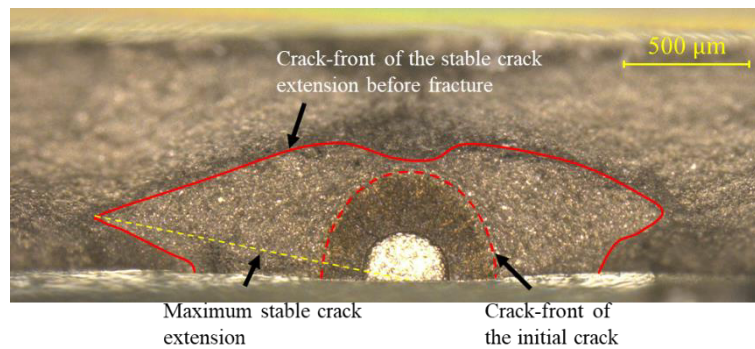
Fractographic analysis with optical microscope of the fracture surface at crack plane of the biaxial specimen E1 (lower part).
